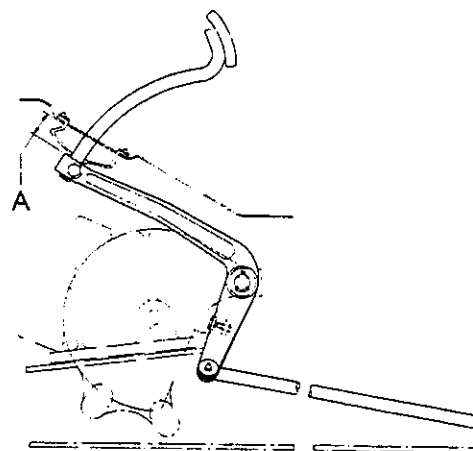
Clutch pedal setting dimension<sup>2297</sup>
